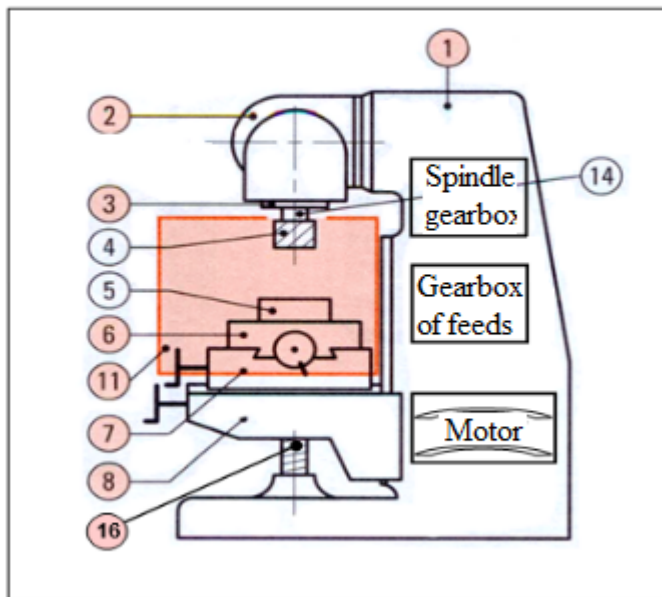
is a milling machine with its main components and its movements obtained by the gearbox (cutting movement) and the feed box (feed movement).
